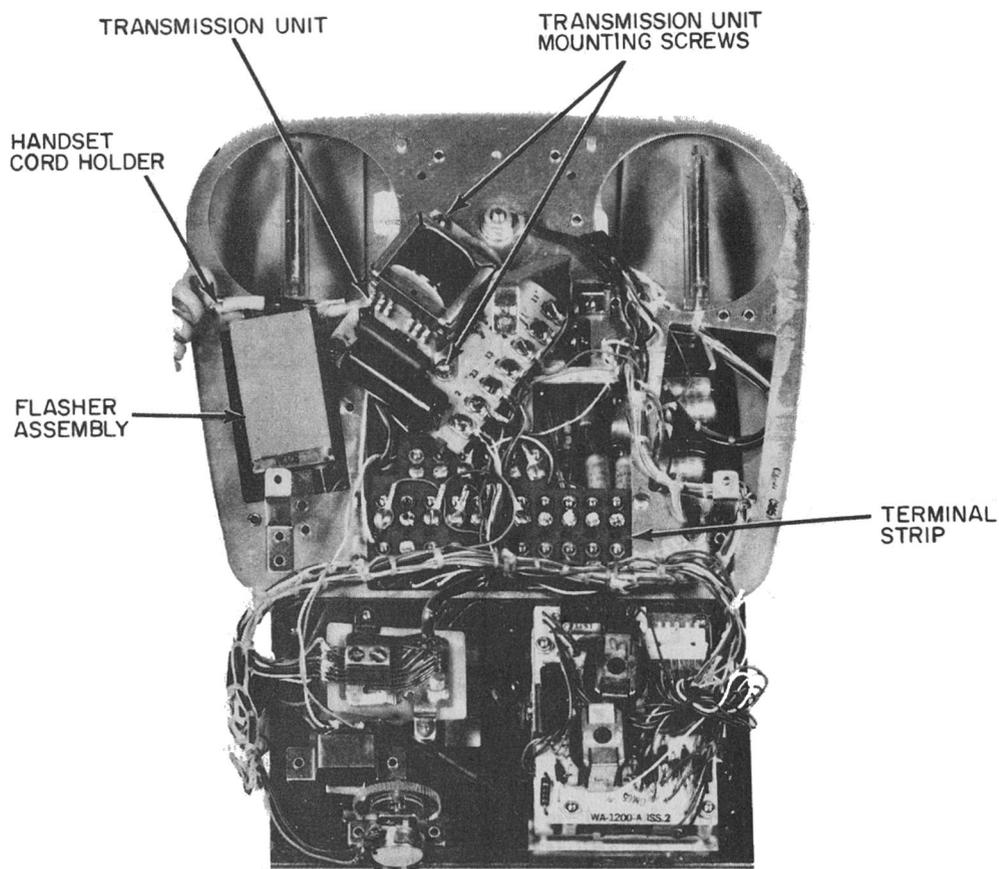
Top View of Main Unit Assembly with Upper Housing Removed and Backing Plate Turned Over.
